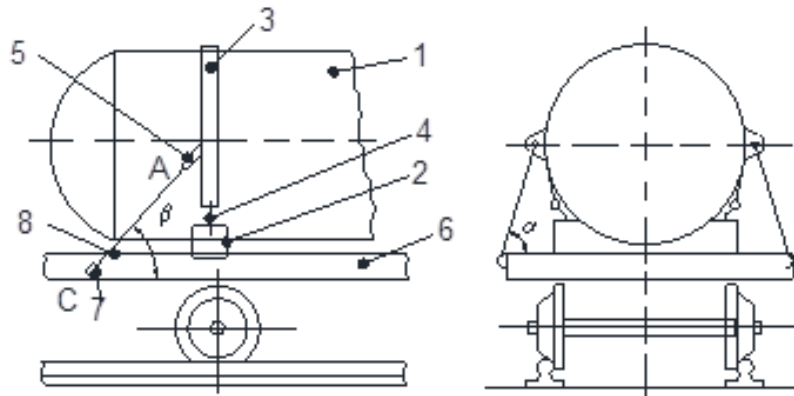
A way of anchoring technological equipment on transportation platforms (sketch)
